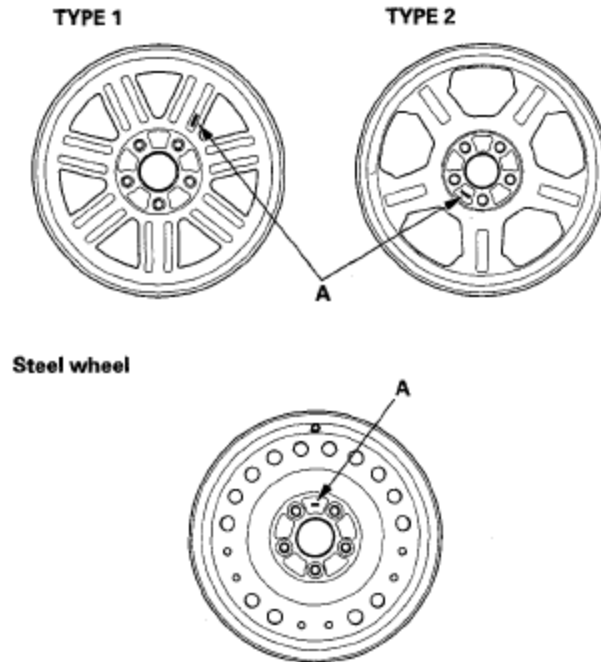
Identifying Aluminum Wheel And Steel Wheel
